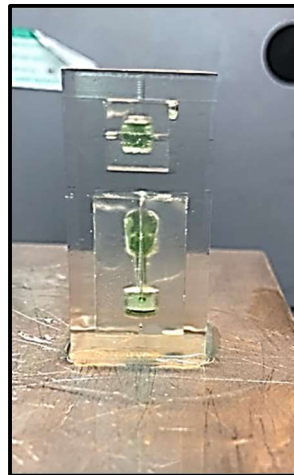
Demonstration package with two adaptor pieces inserted and stacked vertically. After demonstrating inserting large geometries into a free-standing package, large complex geometries were constructed with corresponding adaptor pieces (Figure 4.36) and the completed package shown in Figure 4.37. These constructions are further discussed in section 5.3.3. The next evolution of the process was to insert large electrical components arranged in three dimensions with electrical connections as described in section 4.3.3.
